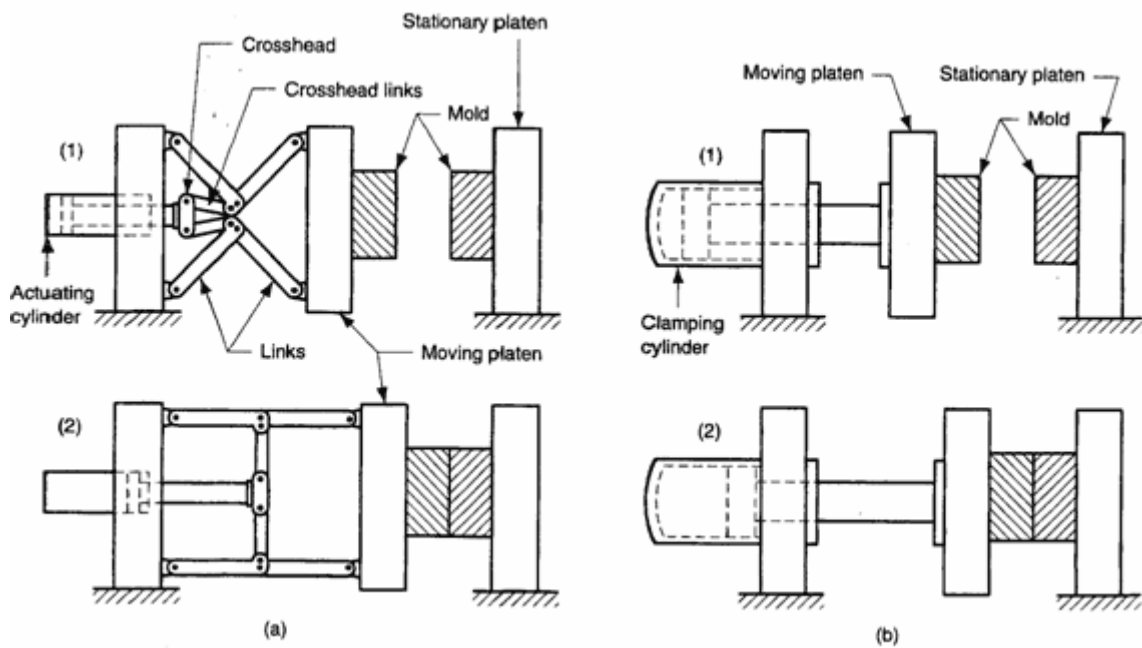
Hydraulic clamp & Toggle clamp.[2]
